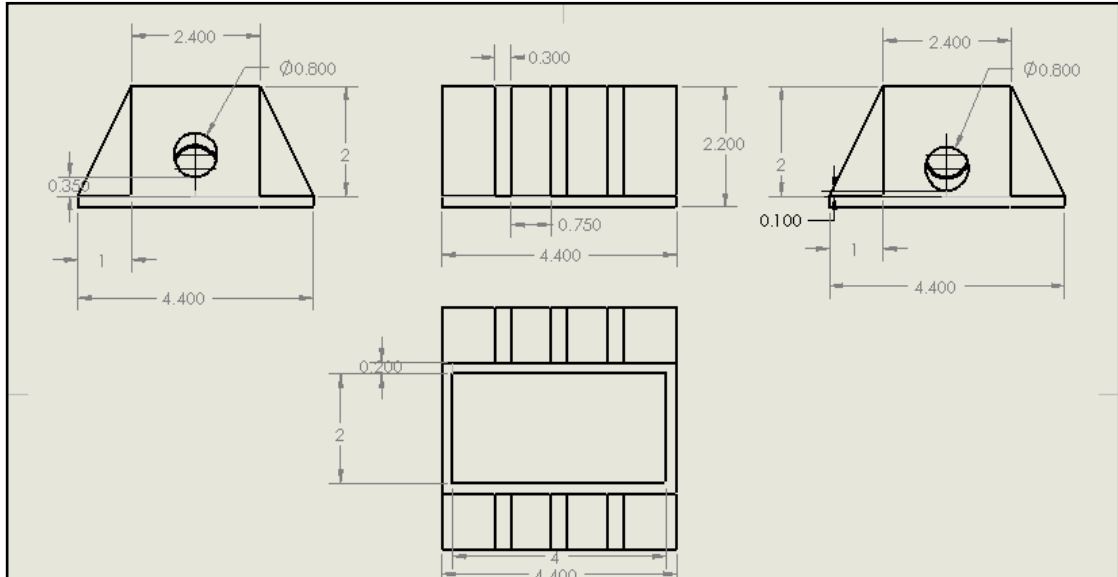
Triple Tank Rectangular Design 2D view (Tank 1)
